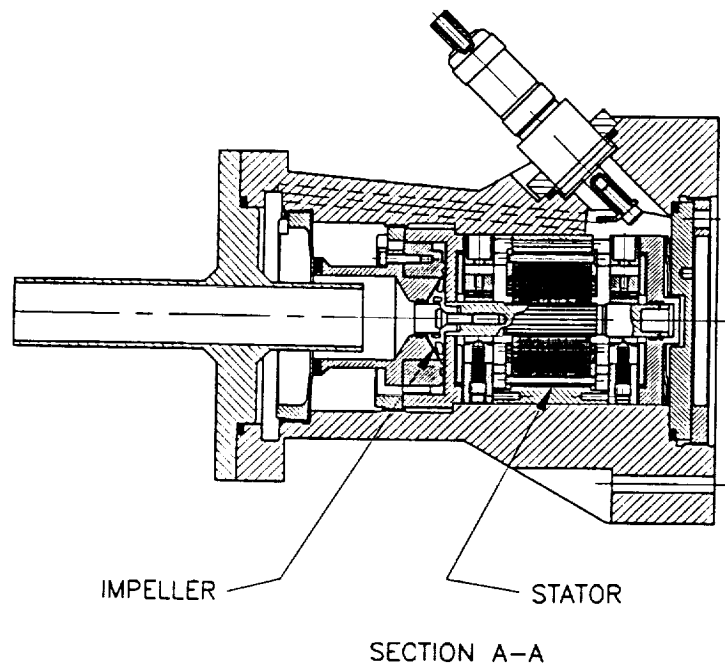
Cross Section Assembly of Engineering Model Compressor
